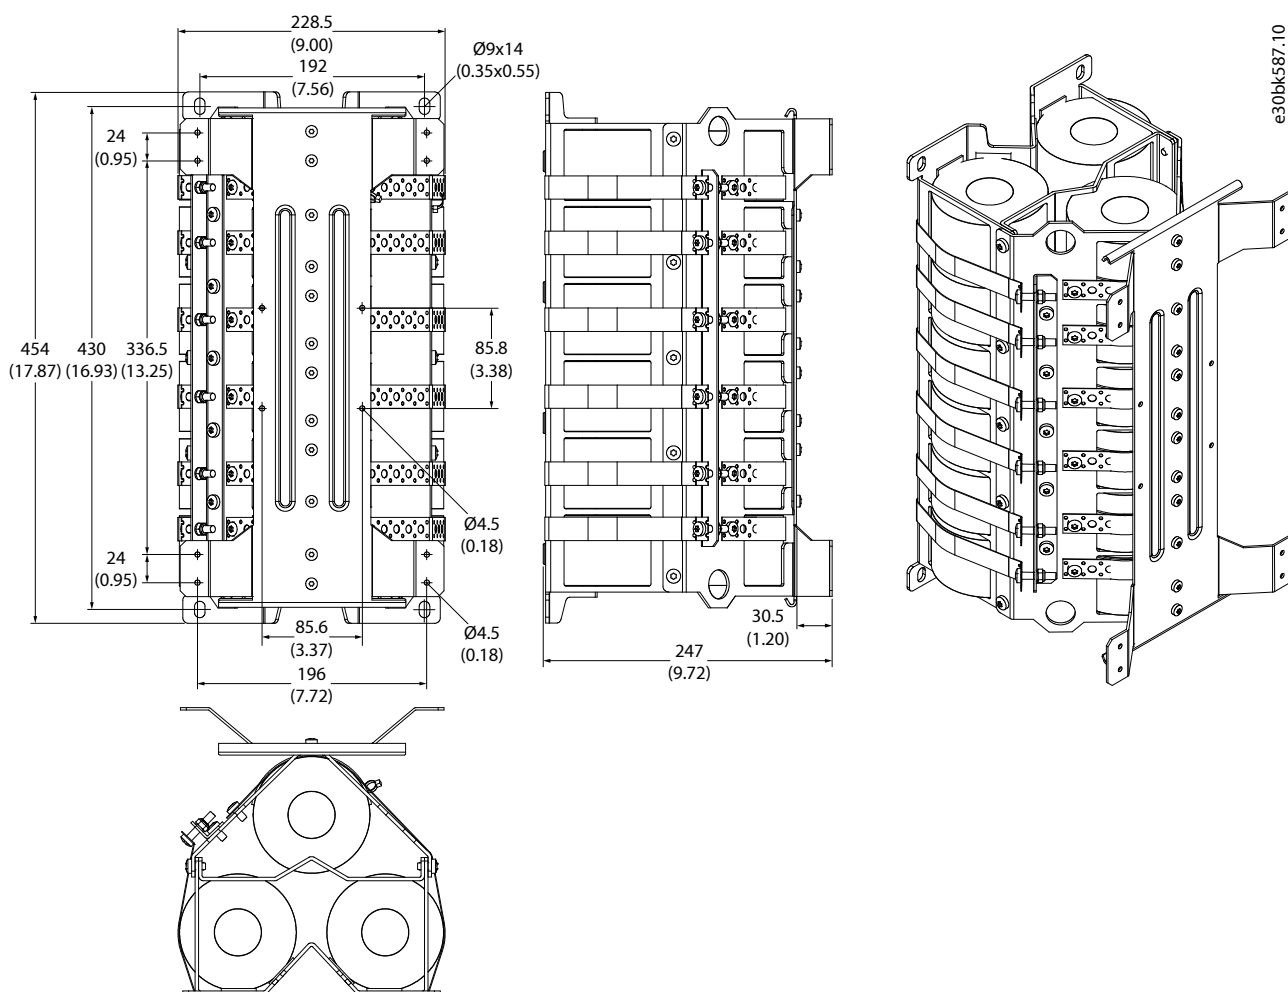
Dimensions of the dU/dt Filter 880 A Inductor in mm (in)
